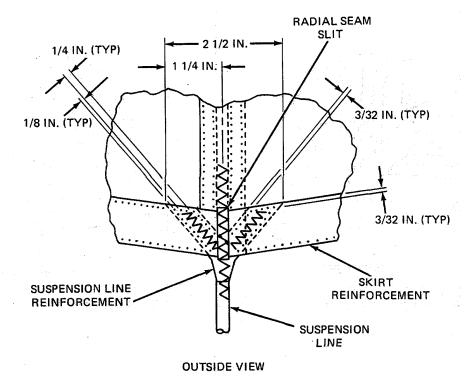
Suspension Line Reinforcement (V-Tab) Construction Details.
